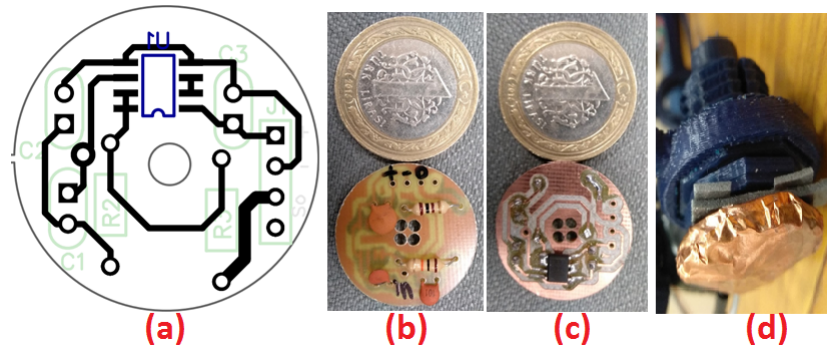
(a) Active circuit layout (b) active circuit PCB (top view) (c) active circuit PCB (bottom view) (d) The complete dry active electrode having dry electrode and active circuit wrapped in thin copper sheet to provide shielding to the circuit
